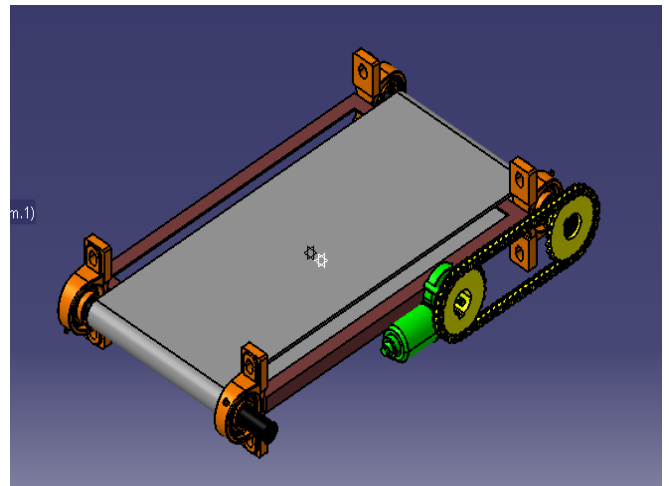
Conveyor System with Bearing, Wiper Motor, Chain Sprocket, and Shaft & L-angle bar
